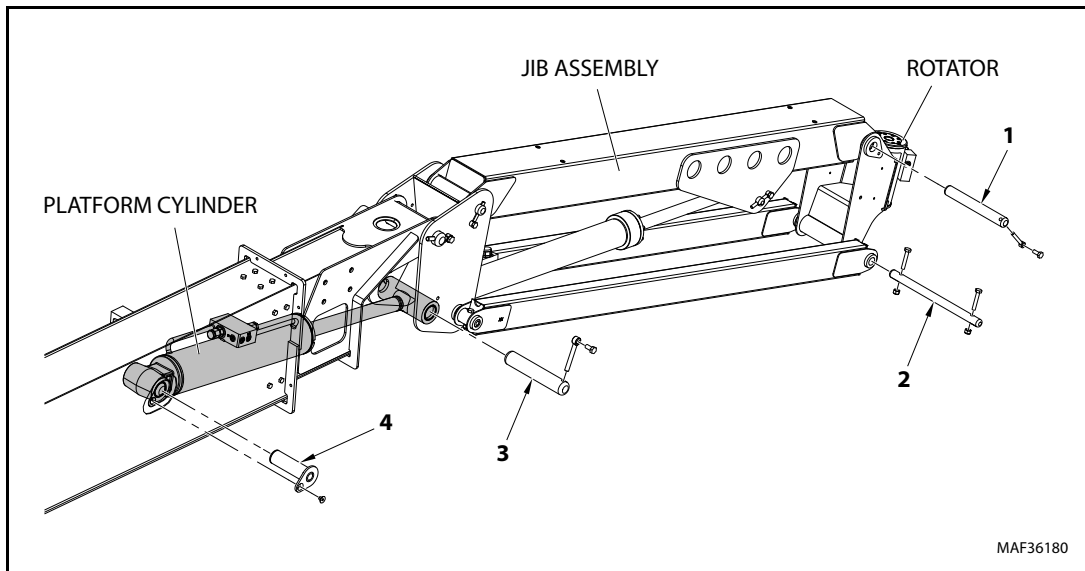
Removal/Installation of Components - Rotator and Platform Slave Level Cylinder
